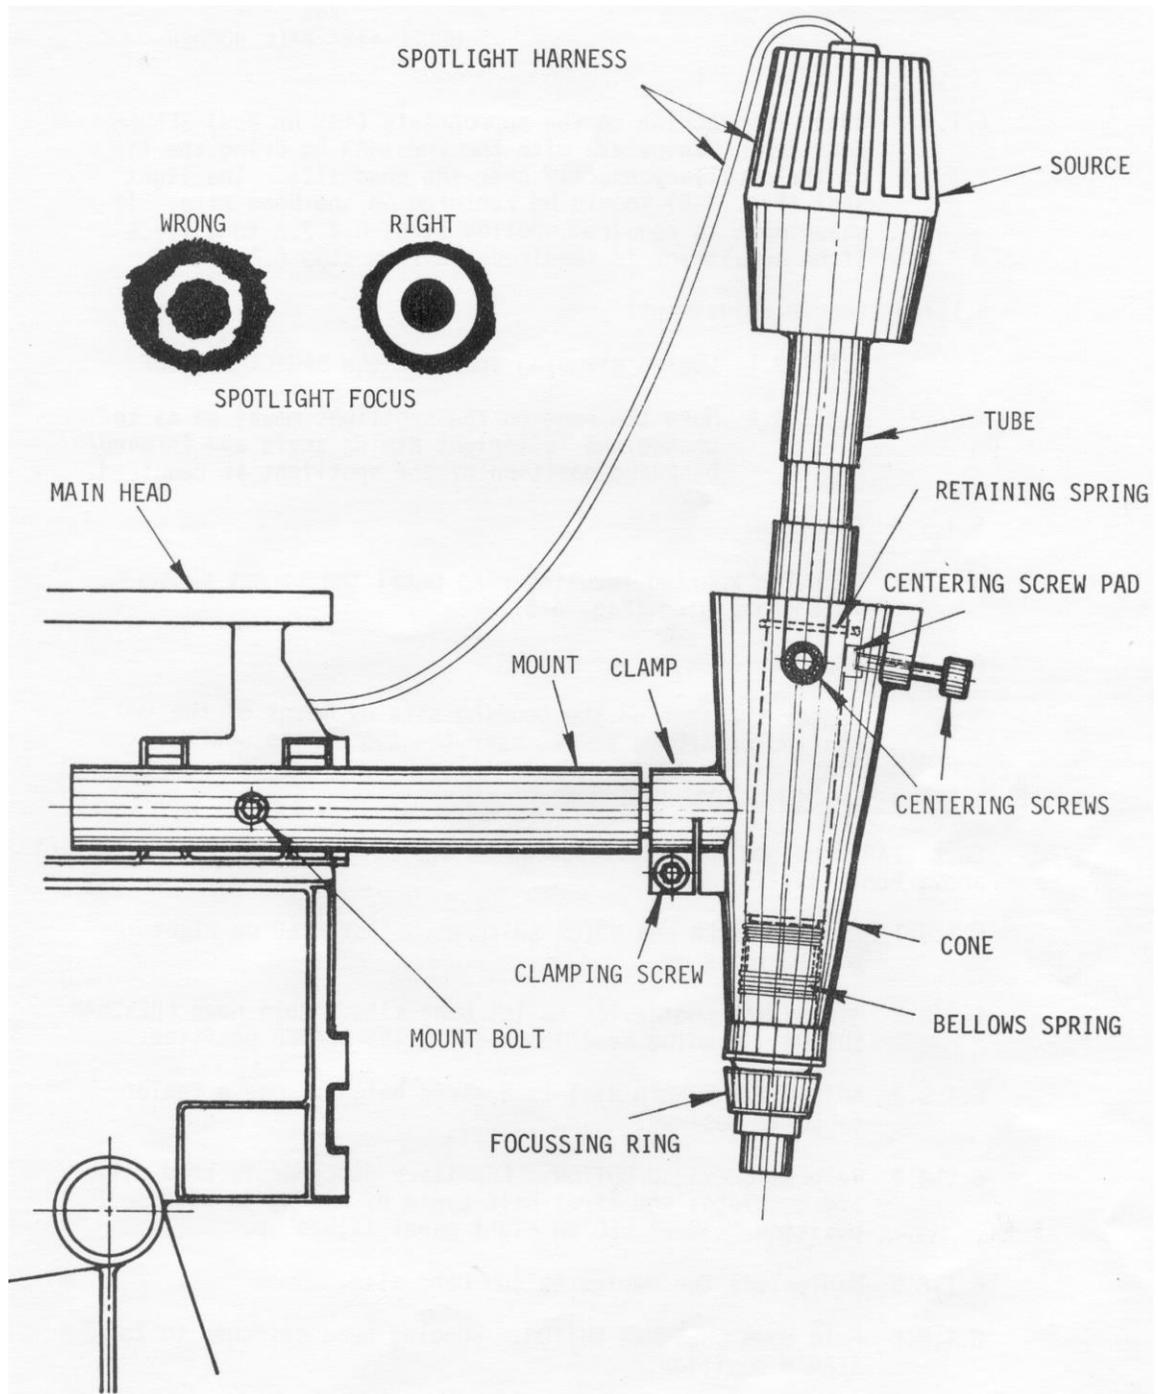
SPOTLIGHT MOUNTING AND ADJUSTMENT
